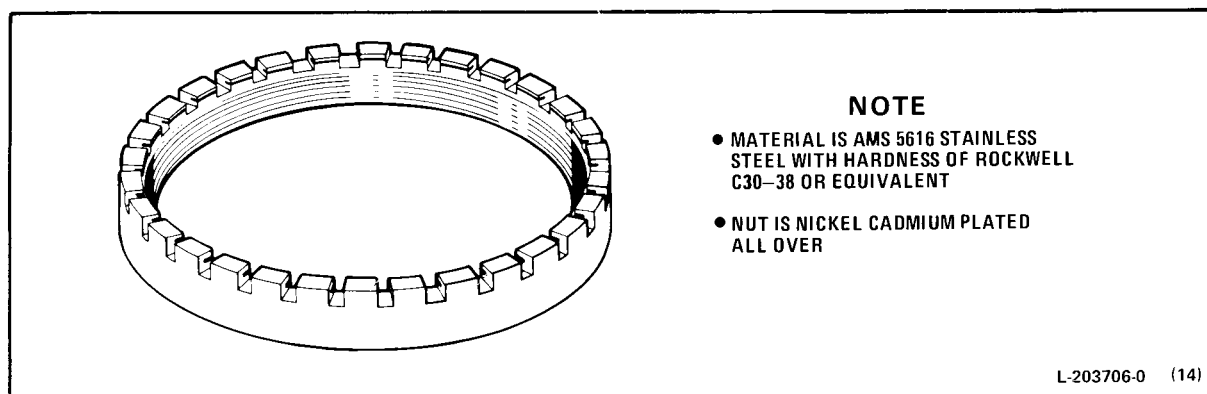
Bearing Retaining Nut (PN 4001860) - Nickel-Cadmium Plate Replacement
